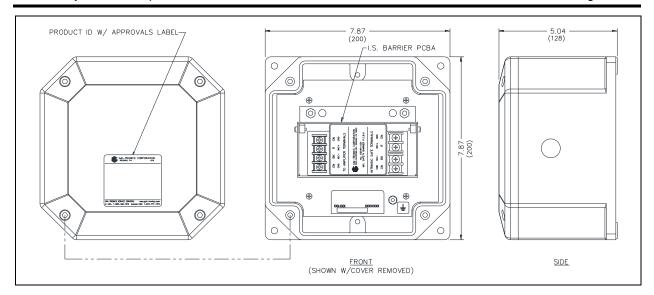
Model 10438-101 Microphone I.S. Barrier Outline Drawing
